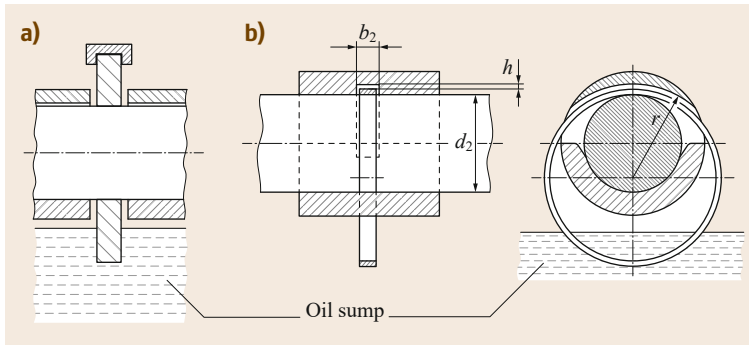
,b Ring lubrication: (a) fixed oil ring with wiper for oil discharge on both sides and (b) loose oil ring, projection (after [15.84])
